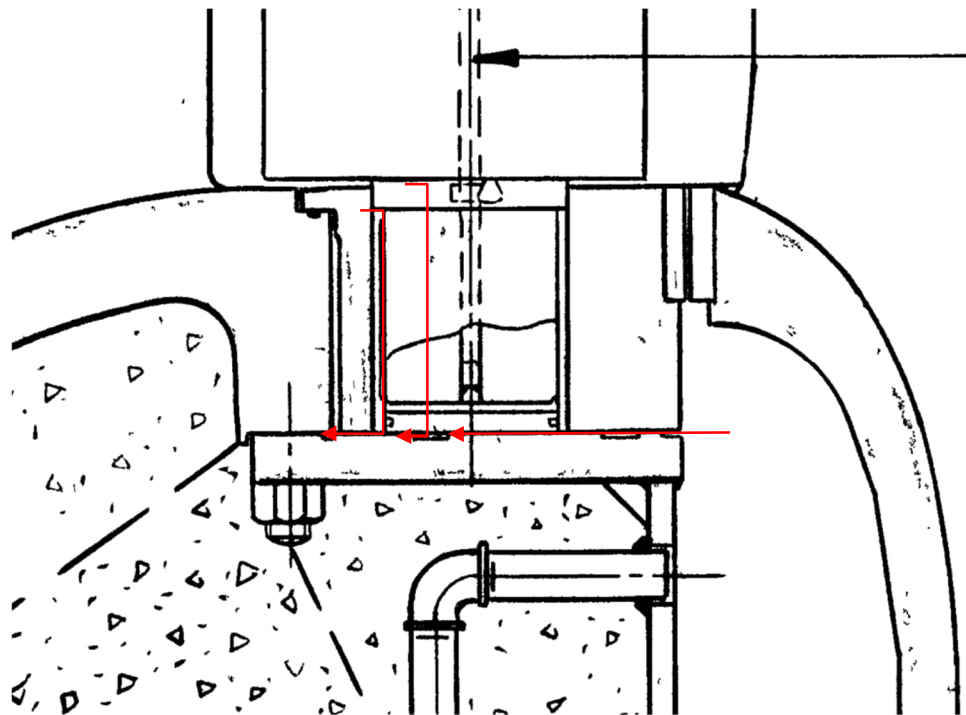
Leakage Paths to Stay Ring and Discharge Ring Flange
